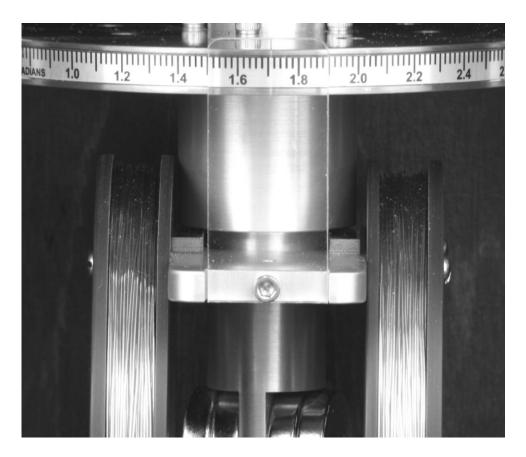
The rotor set-up tool, in place supporting the rotor
